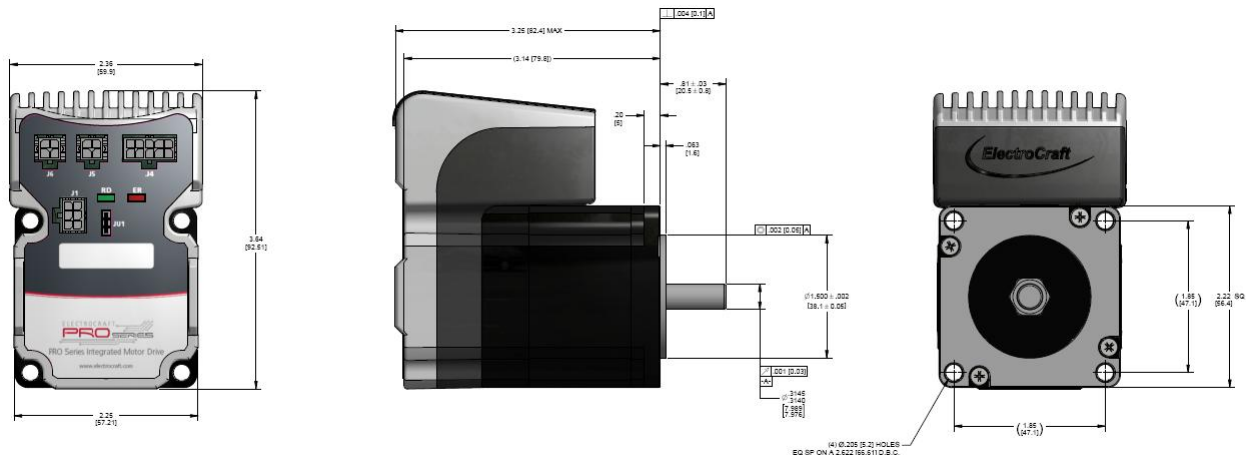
PT56-A106V48A-0-D-CAN mechanical dimensions.
